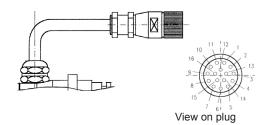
Cable/connector assembly for BRGE1-...-S/SR
